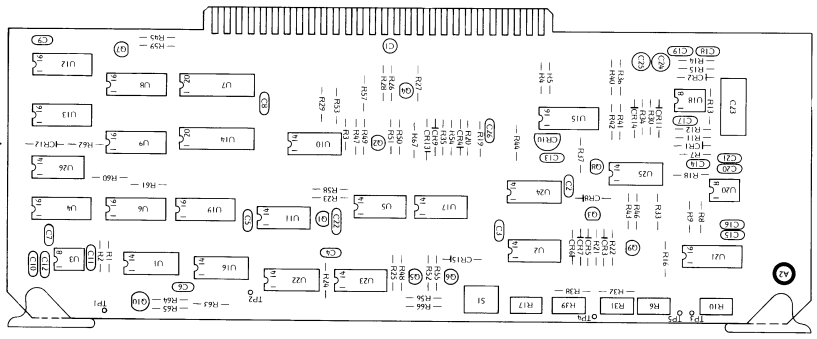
A2 Ramp Generator PCB Schematic (Sheet 1 of 3)
